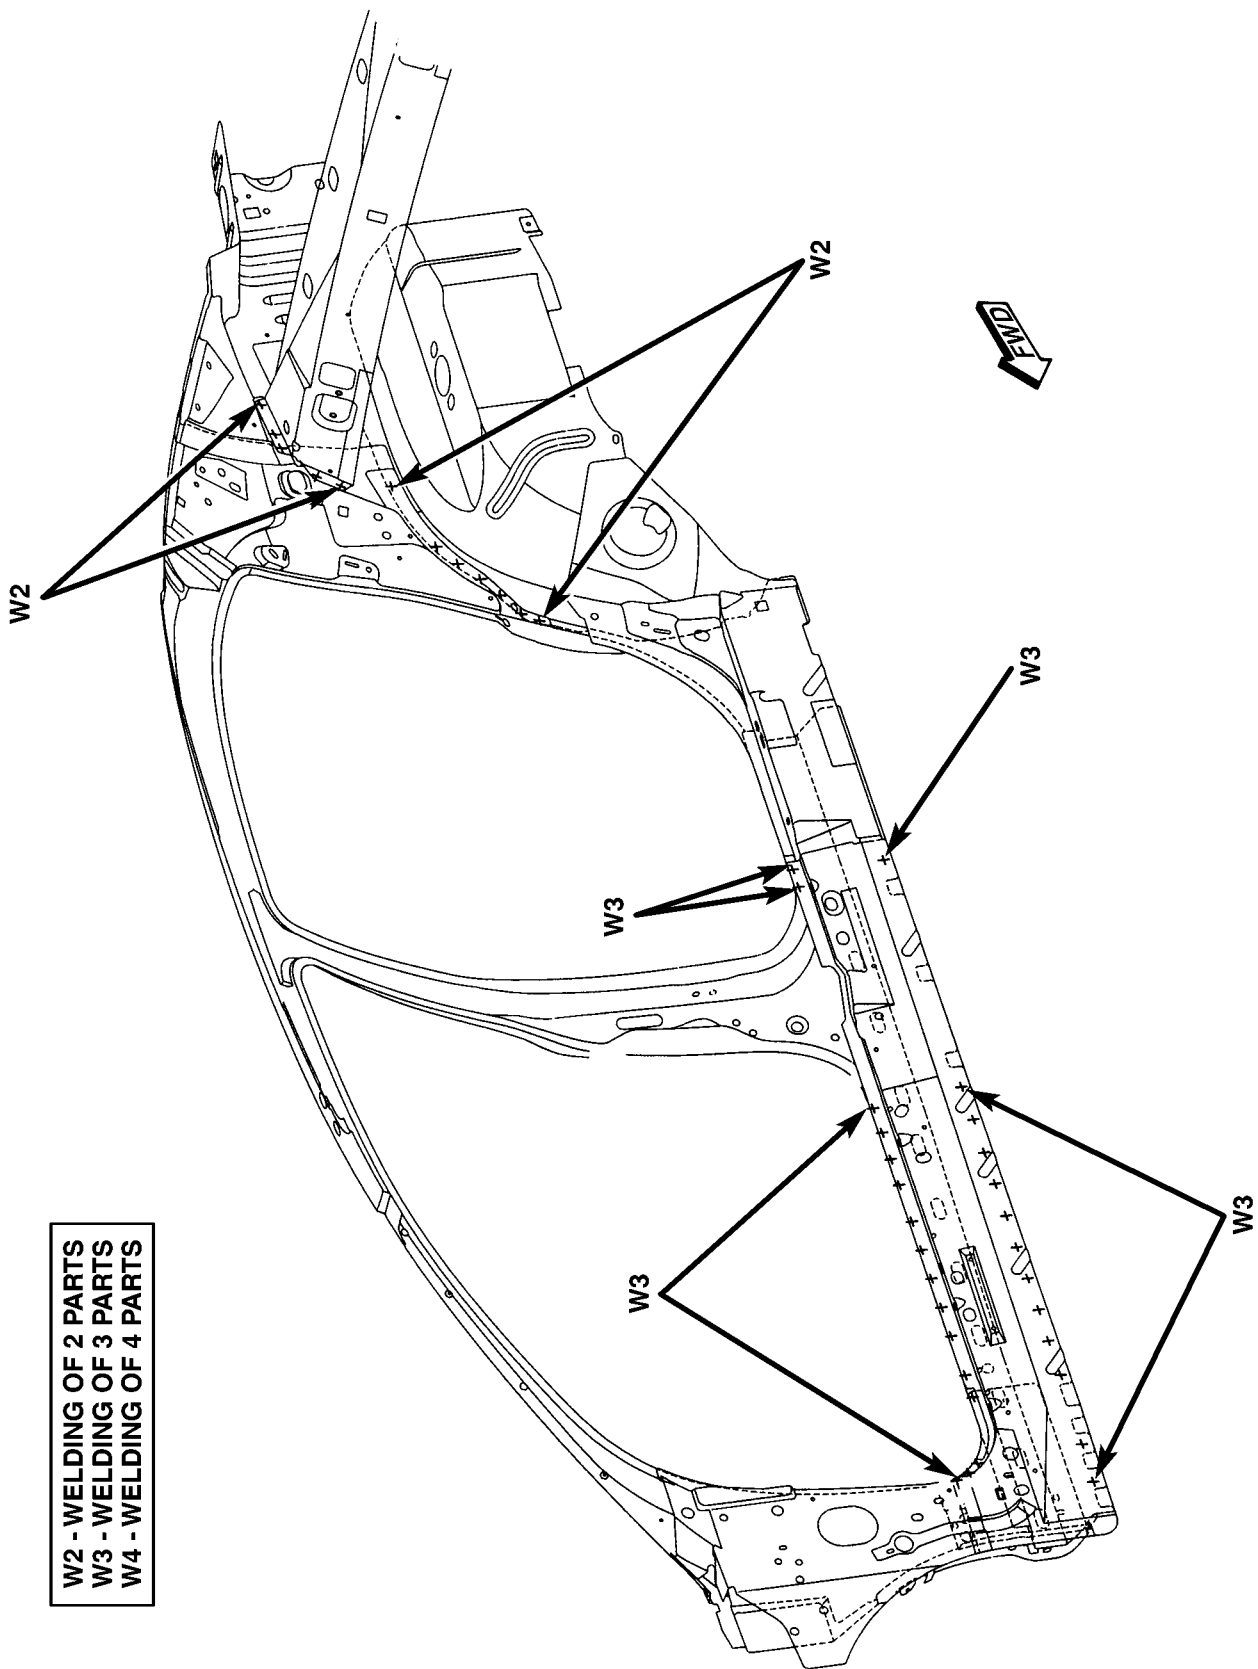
INNER BODY SILL TO HINGE PILLAR REINFORCEMENT TO SILL BEAM TO BODY SIDE APERTURE
